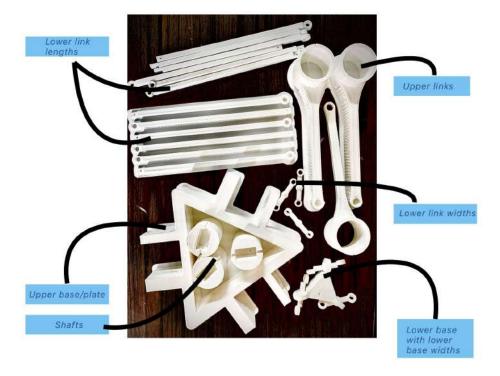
Fabricated Delta robot frame using 3D printed PLA components
